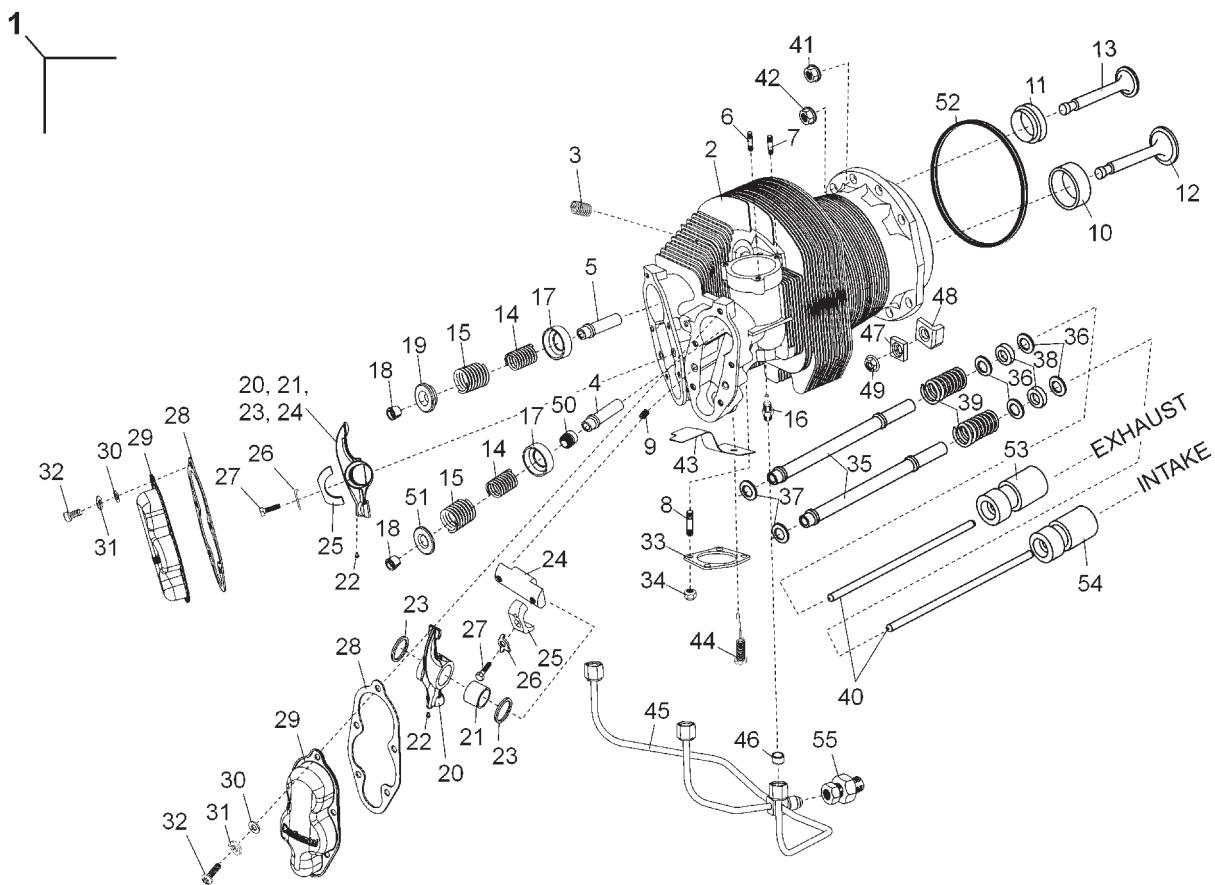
Crossflow Cylinder Assembly G N P R
